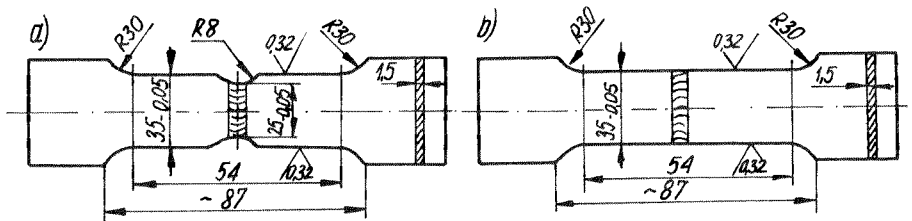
Shapes and dimensions of specimens used for fatigue tests
